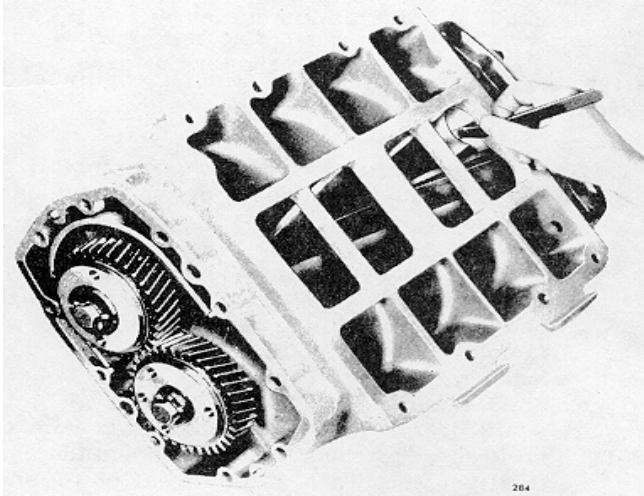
Measuring End Clearance Between Blower Rotors and Housing
